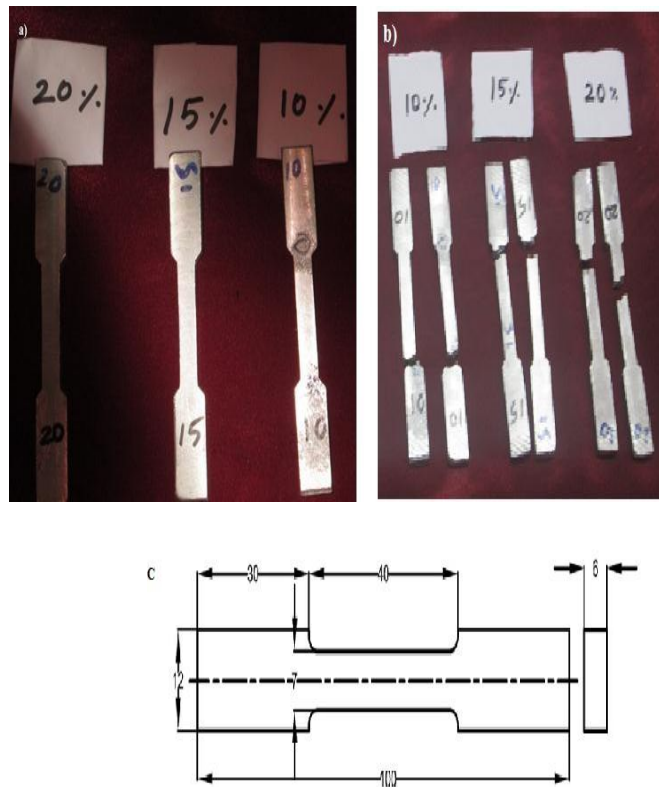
Tensile specimens of AA6061-TiC composites a) before test b) After test c) Dimensions of tensile Specimen
